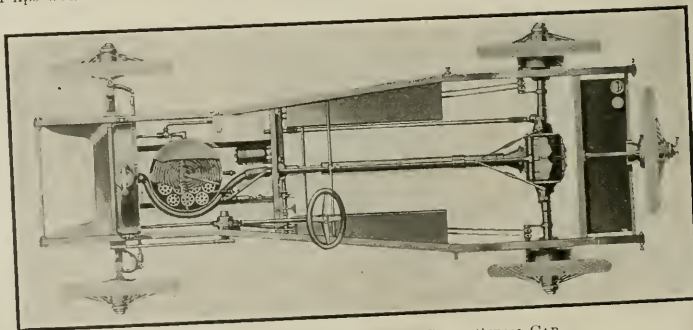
GENERAL ARRANGEMENT OF COATS STEAM CAR
